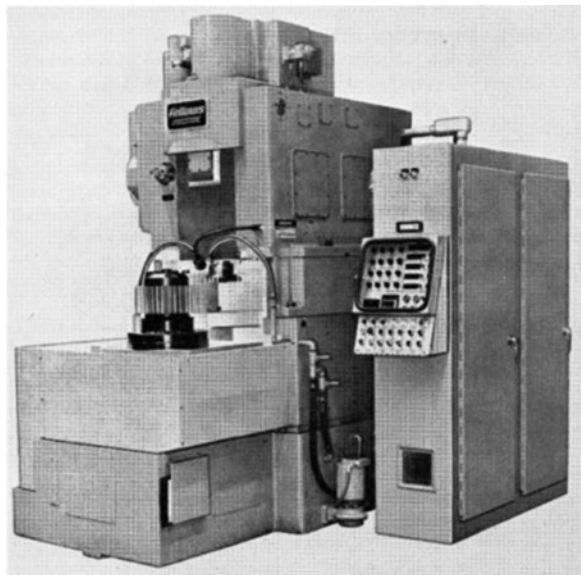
The *Hydrostroke* gear-shaping machine. (Courtesy of Fellows Corp., Emhart Machinery Group, Springfield, Vermont.)
